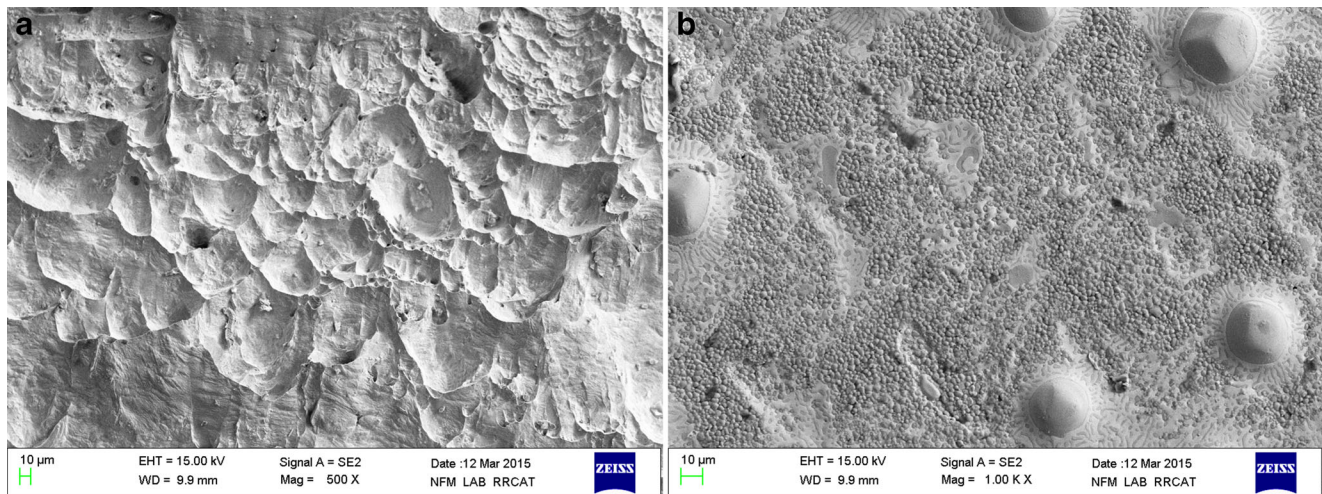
Fracture surface of tensile tested “pickled” 316L stainless steel and OFE Cu brazed specimen. a Coarse dimples and b part of the fracture surface showing copper grains protruding out of re-solidified layer of braze filler metal
